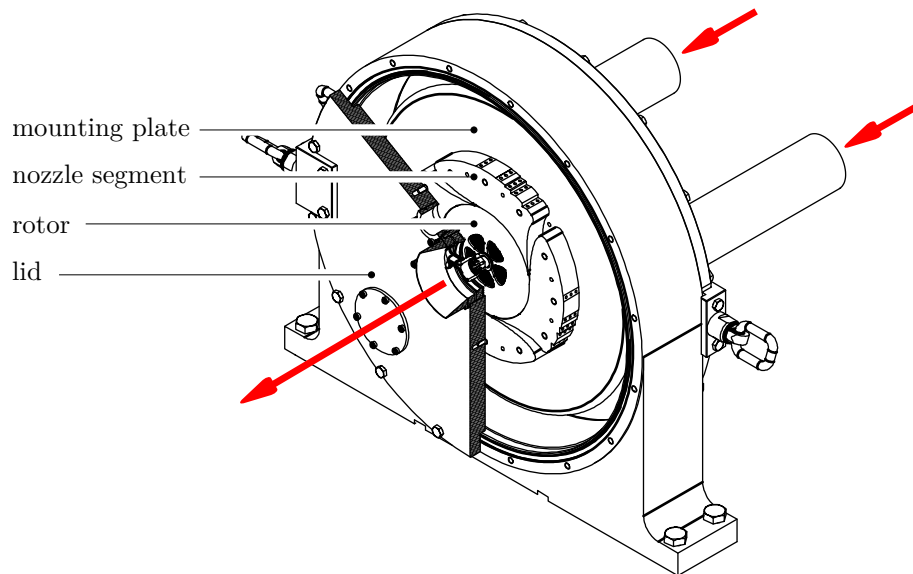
Cut open view of the turbine housing with red arrows indicating air flow direction.
